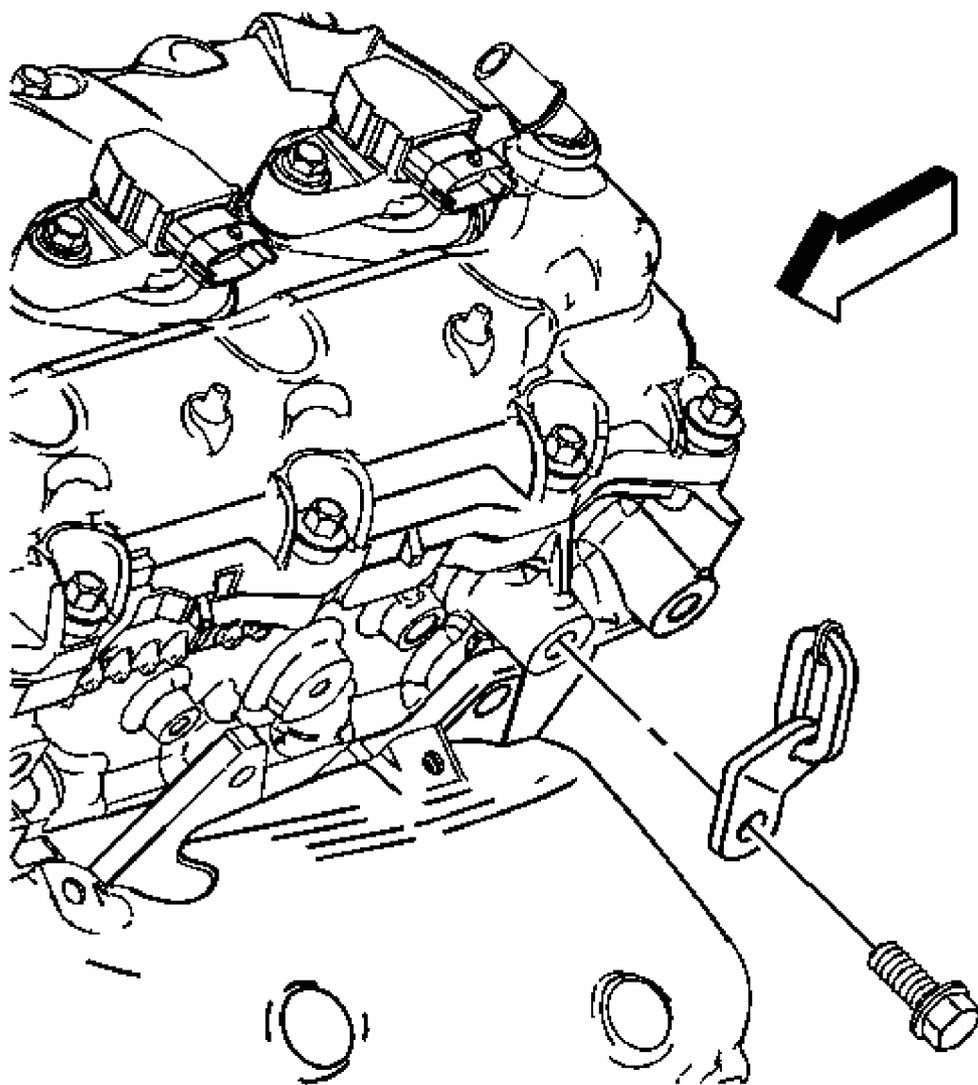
View Of Engine Lift Bracket - Rear Of Left Cylinder Head
